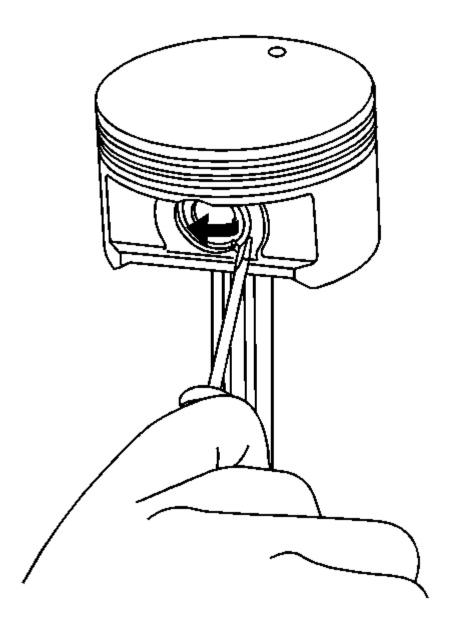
Removing Piston Pin Retaining Clips Courtesy of GENERAL MOTORS CORP.
